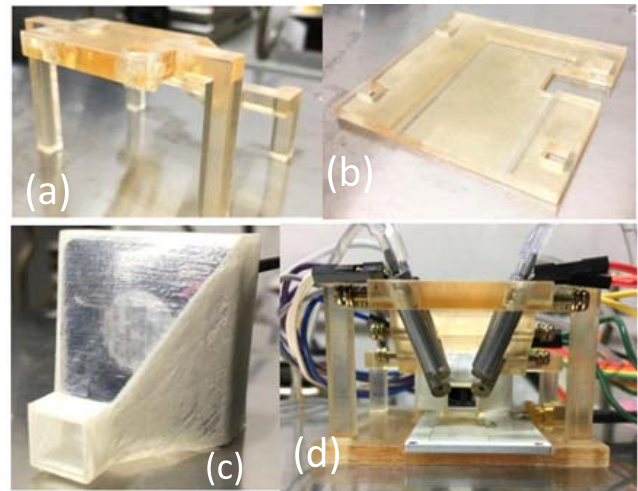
Adaptor for holding solenoid valves: (a) adaptor without solenoid valves, (b) bottom plate, (c) cover for DC fan, and (d) assembled odor blender.
